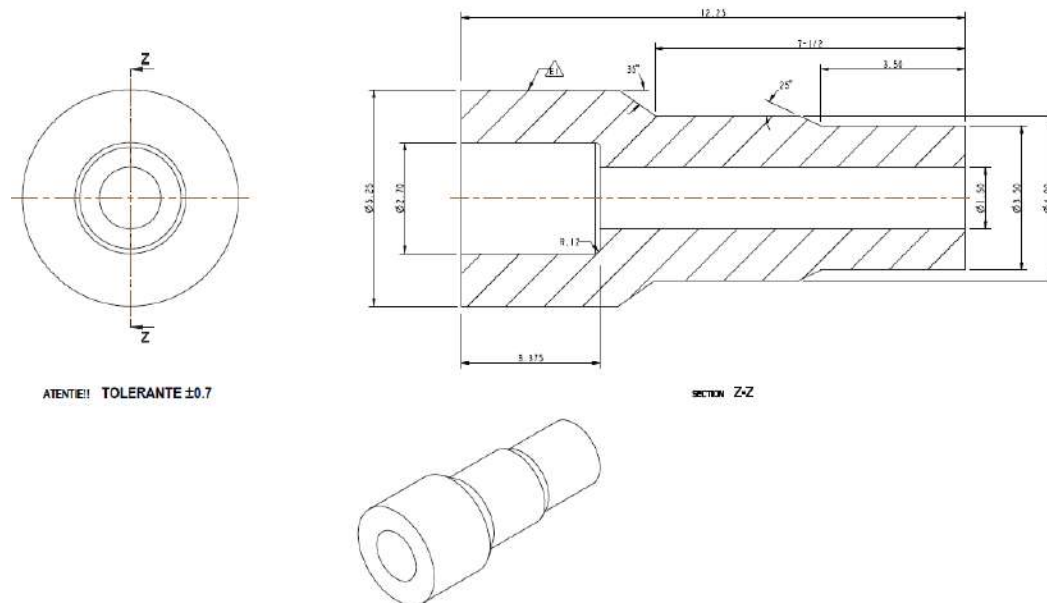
The piece subject to MPS preparation in accordance with DNV-GL-ST-F101 (the dimensions of the drawing are in inches)
